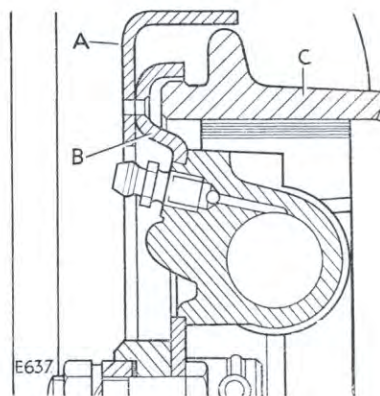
Cross-section of wheel brake mechanism showing mudshield in position.
